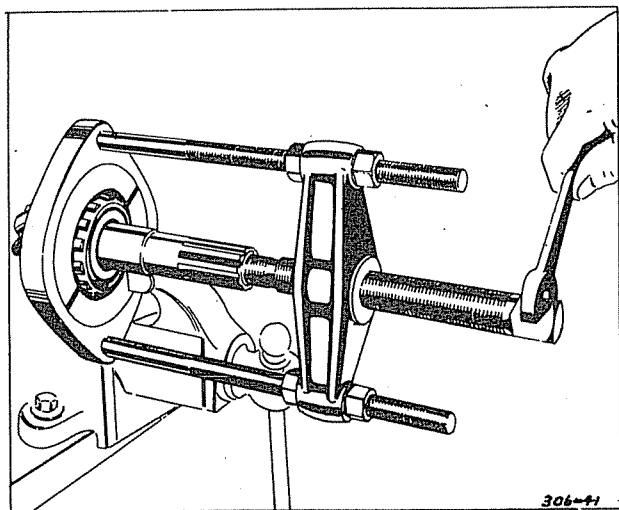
Removing Drive Pinion Bearing With Tool C.293.
